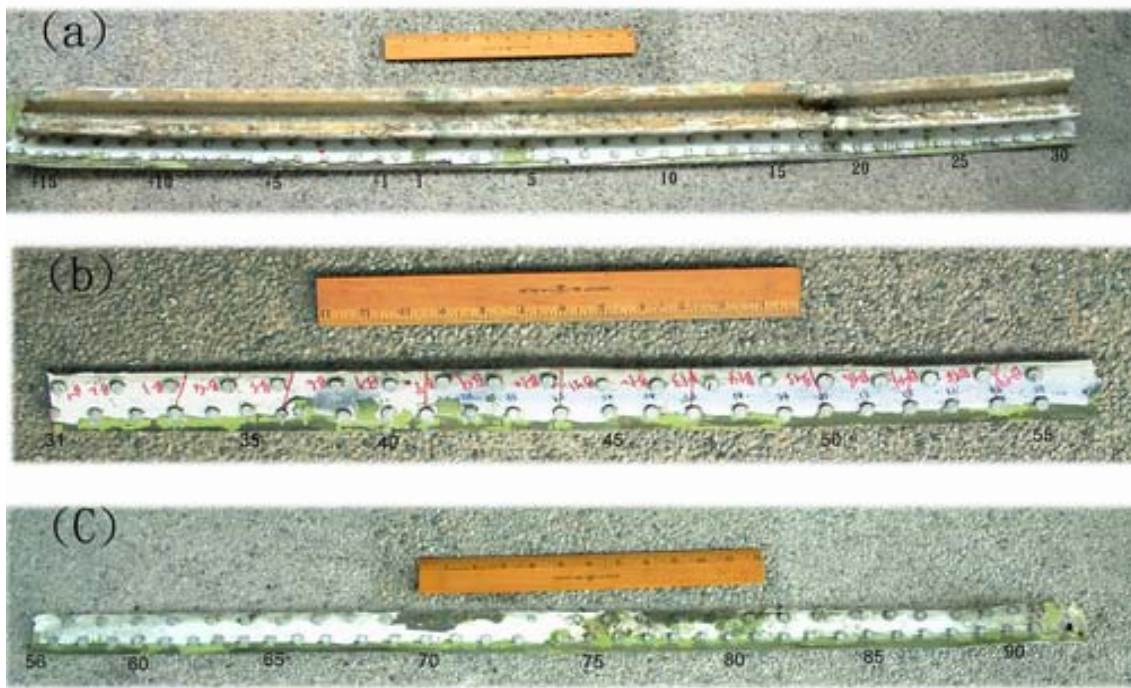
Three sections of the skin fracture incorporating rivets and doubler sections were removed by saw cutting
